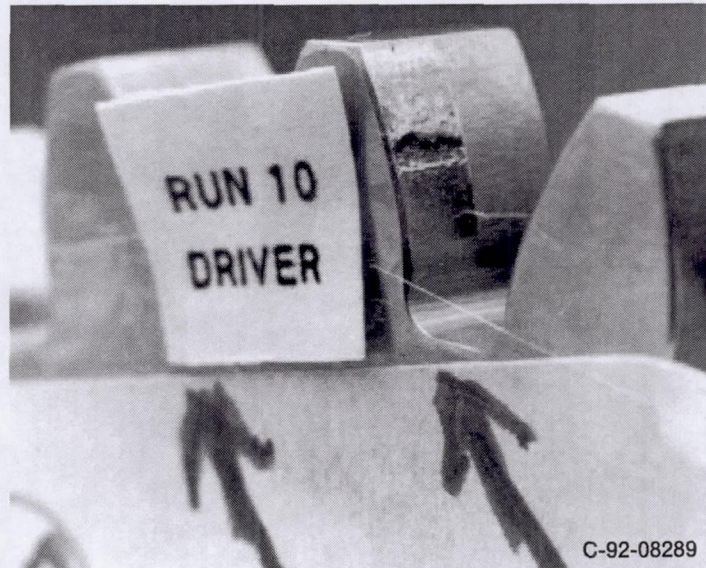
Sample of pitting damage on spur gear fatigue rig (spur test #2).
